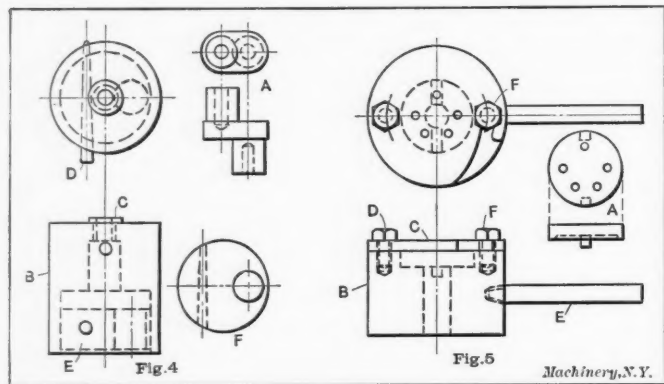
Ingenious Form of Jig for Drilling Crank A
